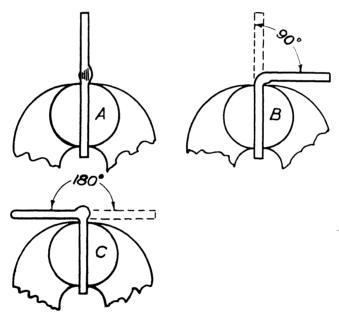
Testing a sample specimen in a vise: A. Before bending, B. After bending 90° (note the weld is closed in on itself to test the penetration), C. After bending back 180°
